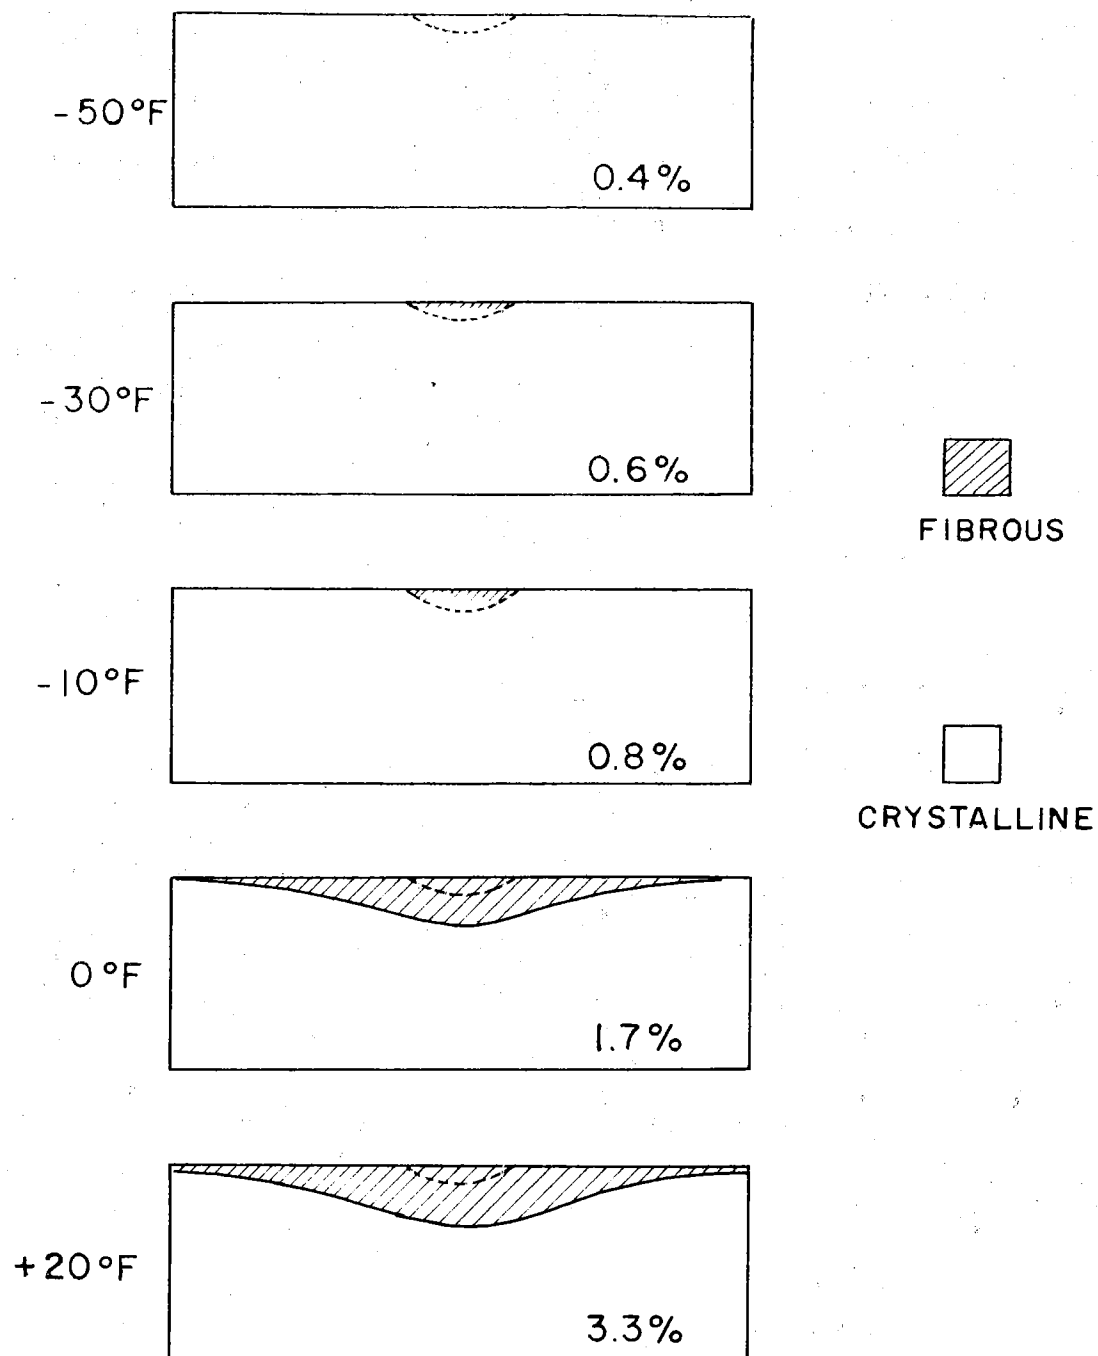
Fracture Behavior of Kinzel Specimens of 1" A-302 Steel, Welded and Postheated.
